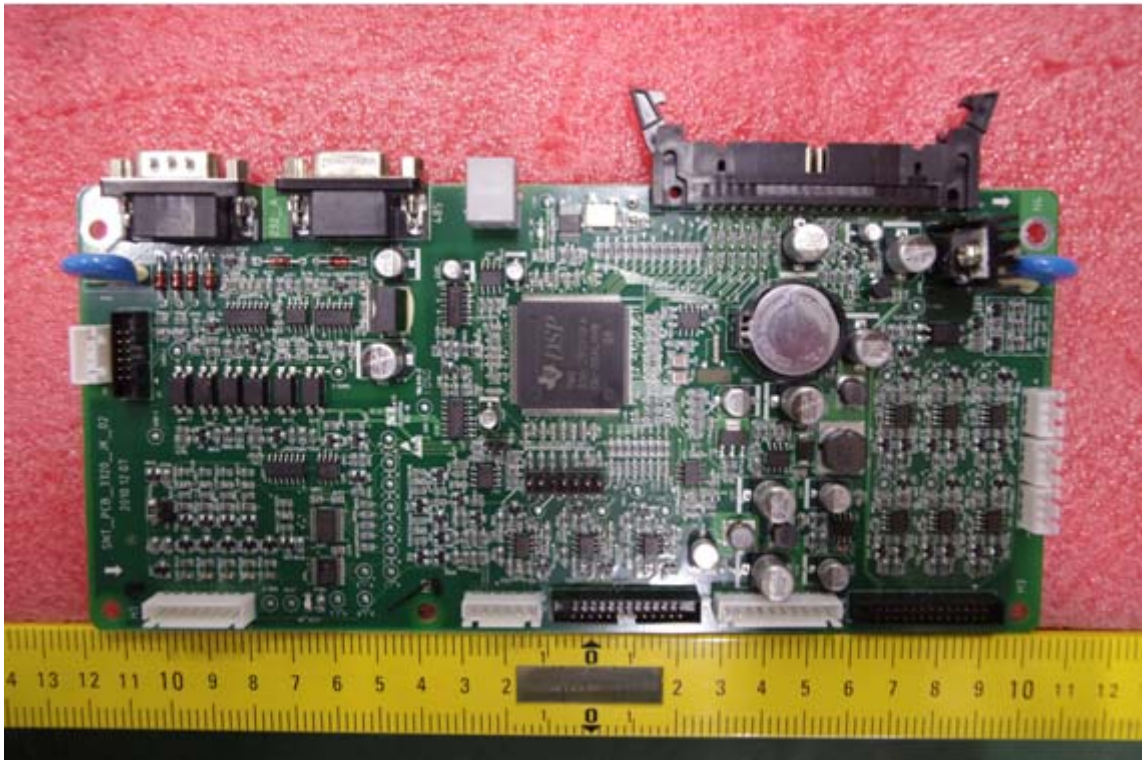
Board SNT\_PCB\_3320\_JK, component side view
